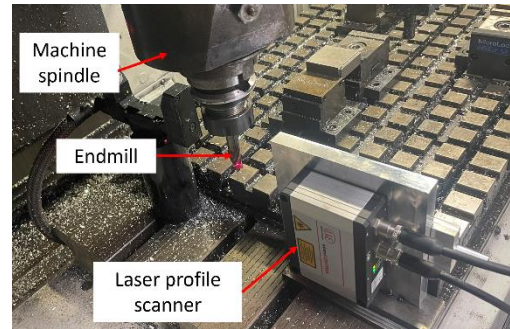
Measurement system installed in Bridgeport VMC 610xp machine tool.
